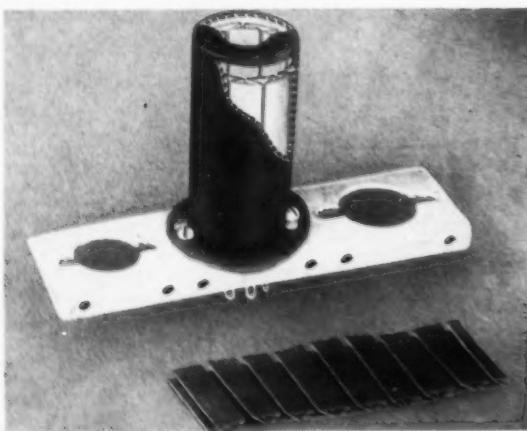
FULL-CONTACT Inserts eliminate tube-shield airspace. One-Piece Shield eliminates tube-socket joint, is black to increase heat radiation.
